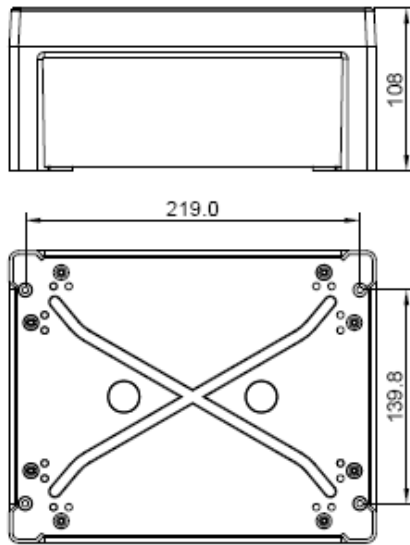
Single Horn Control Unit mounting Installation A131xxxxG1
